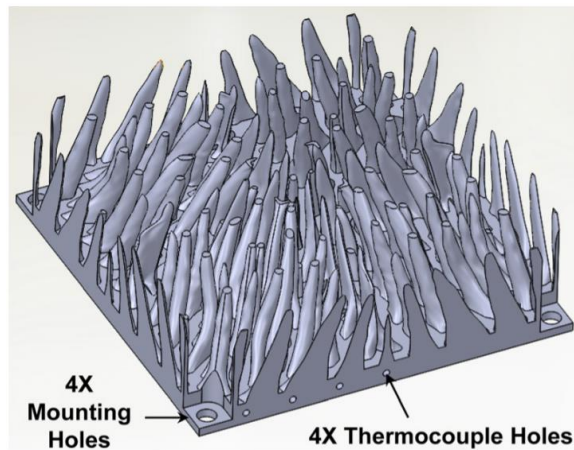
CAD geometry of optimized heat sink (Reprinted from [25])
